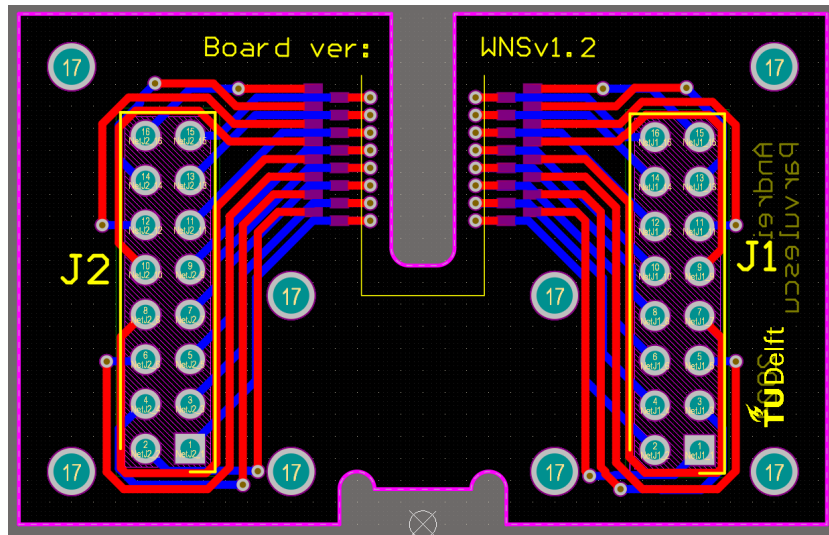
Layout of the PCB for the thruster configuration with nozzle. The placement of the thruster is indicated by the thin yellow lines. The fluidic interface would be placed at the bottom cut-out. The external dimension of the board is 46×29 mm.
